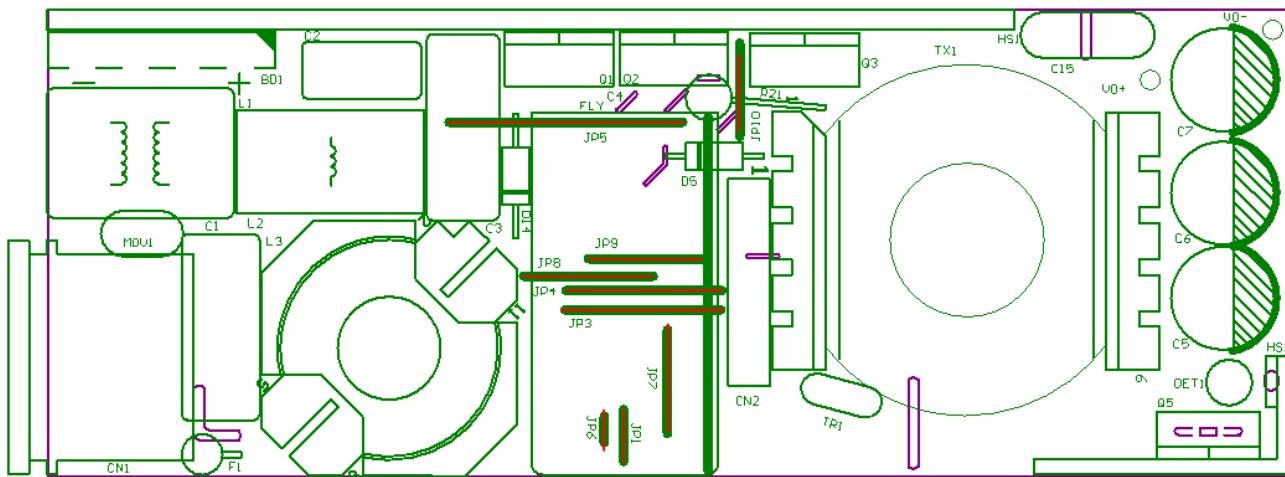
Evaluation Board Layout (Mother Board), Top Overlay
